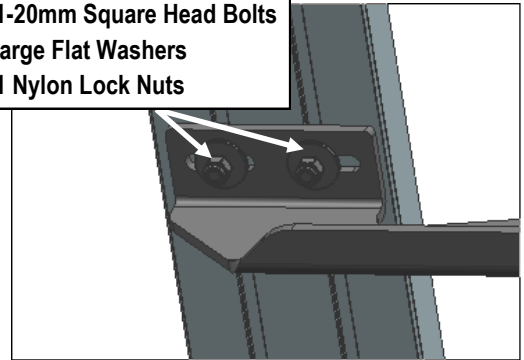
Slip (3) M6X1-20mm Square Head Bolts Into Each Bottom Channel
